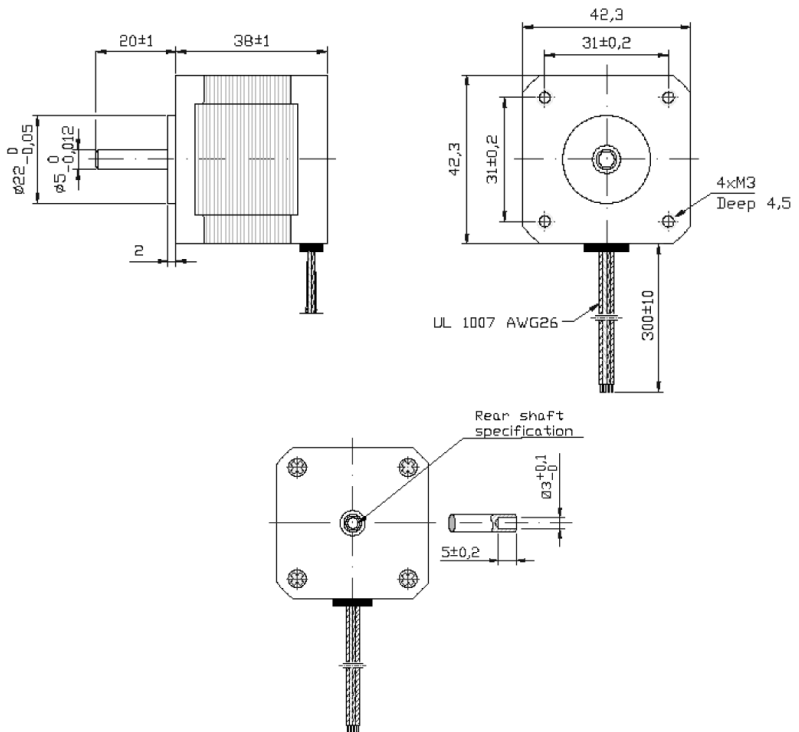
Technical drawing specification of the implemented stepper motor in the structure of the sturdy turntable to motorize the rotating stage. Dimensions are in mm (<https://www.reichelt.de>).
